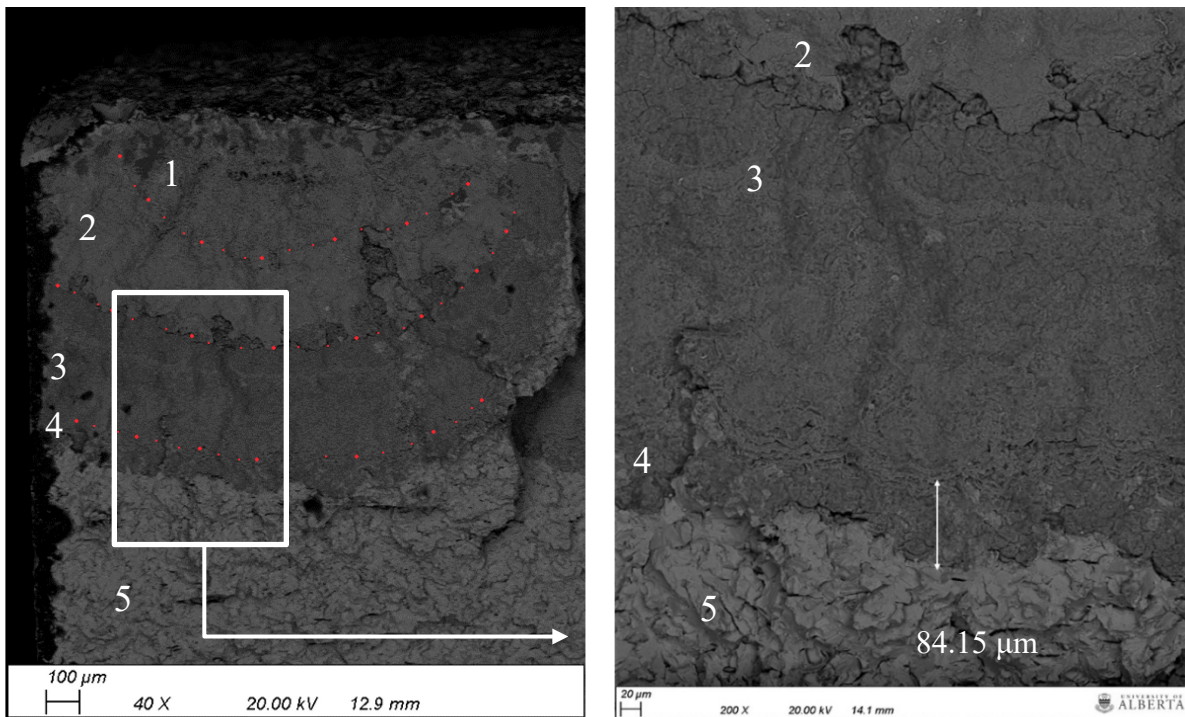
Crack fracture surface exposed to the NNpH environment during testing. Three crack growth zones attributed to growth in the field (1-3); one crack growth zone attributed to growth during the full-scale test (4); and brittle fracture in liquid nitrogen (5). The crack growth zones are separated by bands enhanced with red dotted lines.
